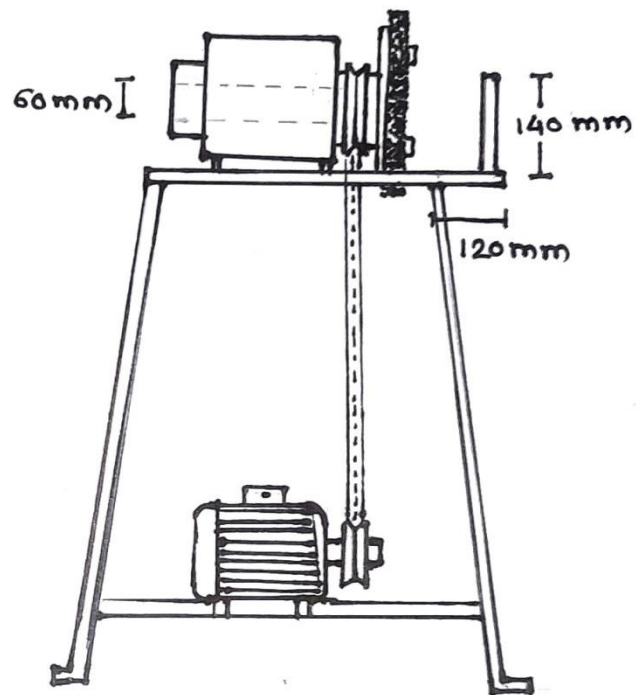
Side View of Sugarcane Peeler cum Cutter Machine
